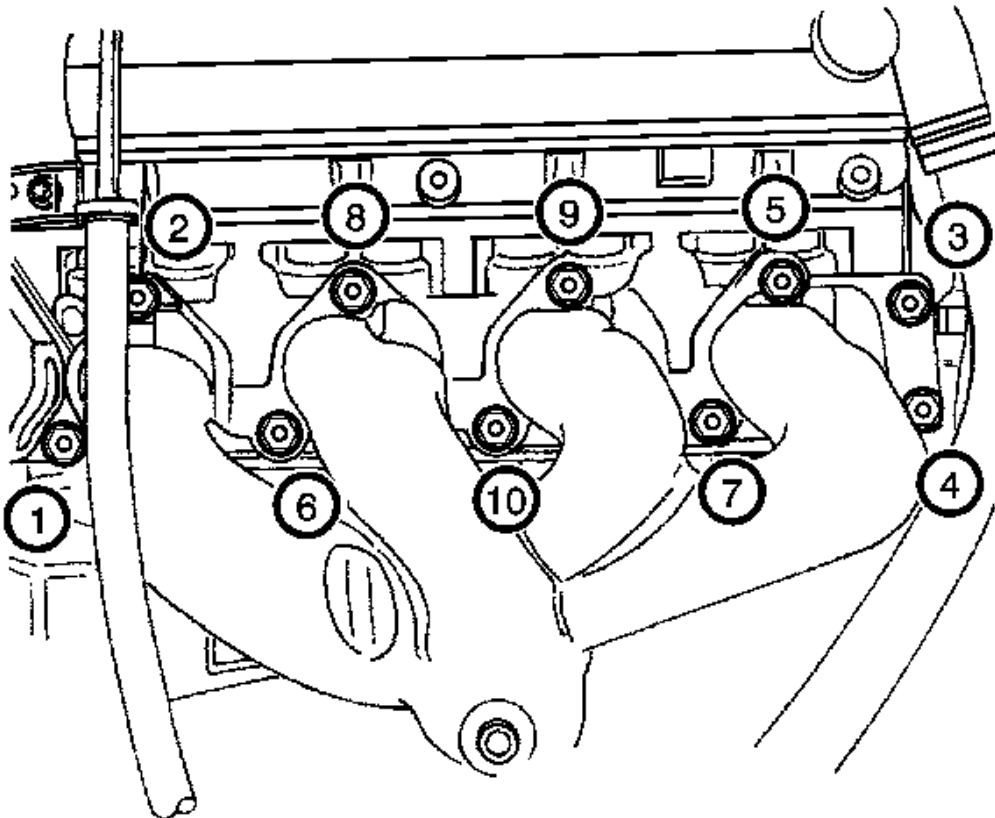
View Of Exhaust Manifold Retaining Nut Removal Sequence
